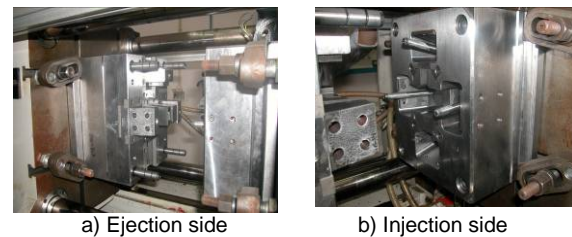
Standard moulding blocks fitted in the mould structure. a) Ejection side b) Injection side
